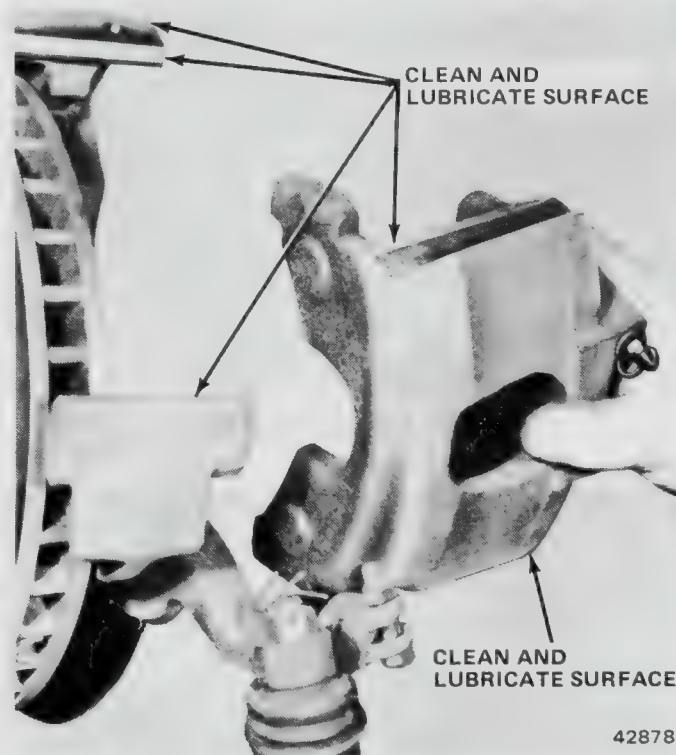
F-27 Caliper and Anchor Plate Abutment Surfaces
